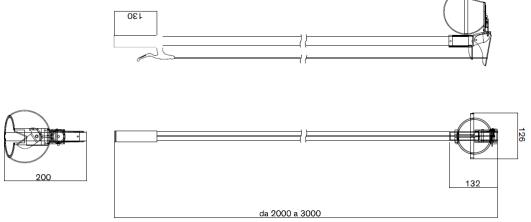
Technical drawings of the hand-tool for collecting kaki fruits.
